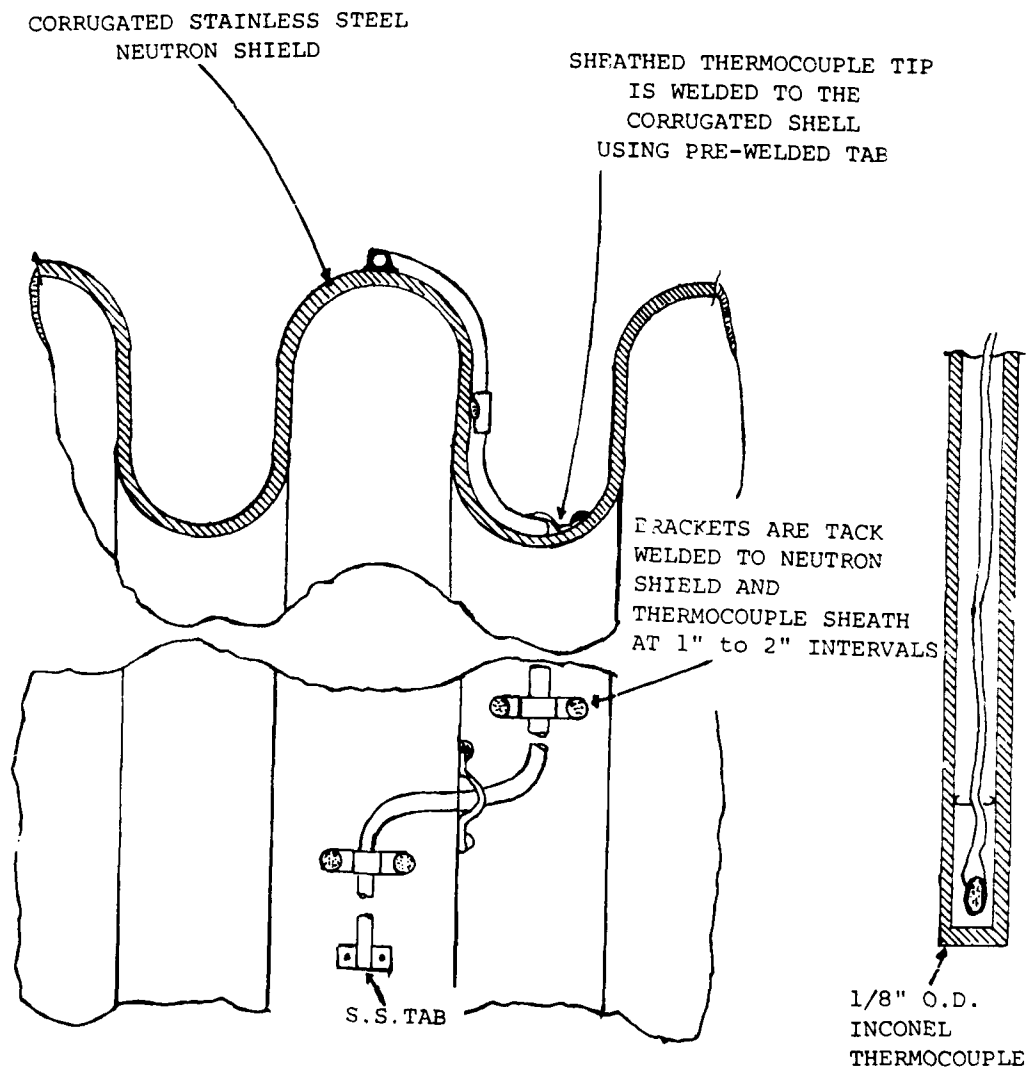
The Thermocouple (TC) Attachment Technique for the Corrugated Surface of the Neutron Shield Jacket (NSJ) of the HNPF Cask
